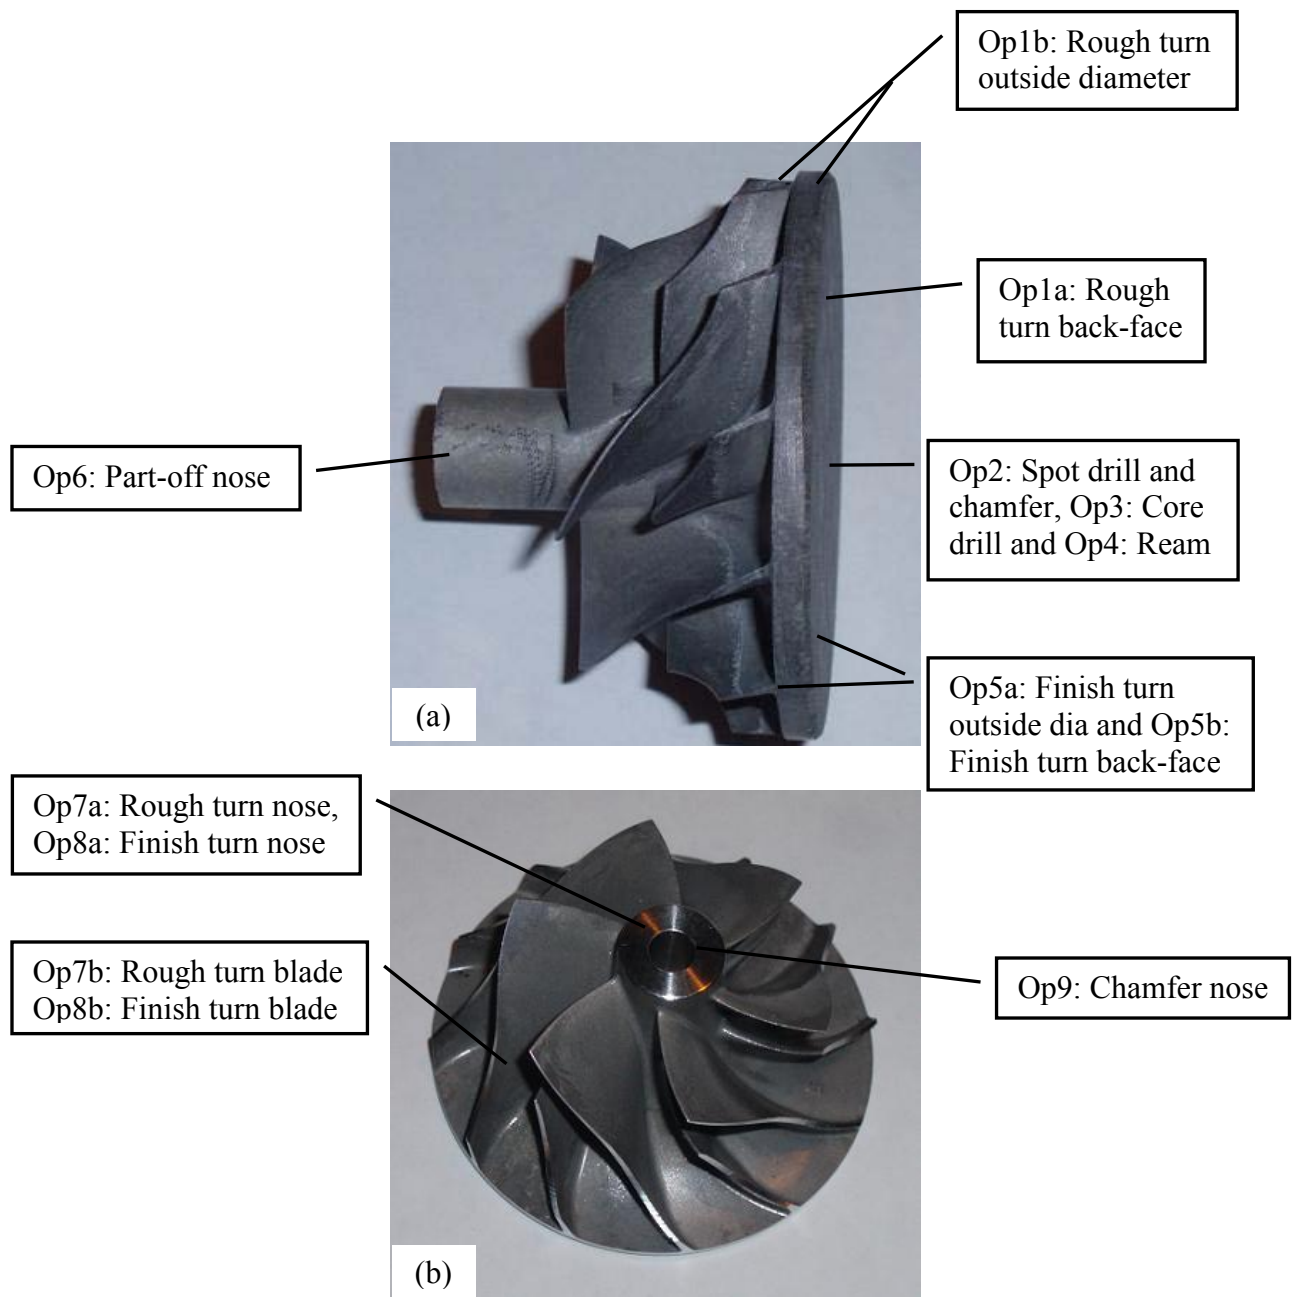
Breakdown of impeller machining operations (a) Op1-6 and (b) Op7-9
